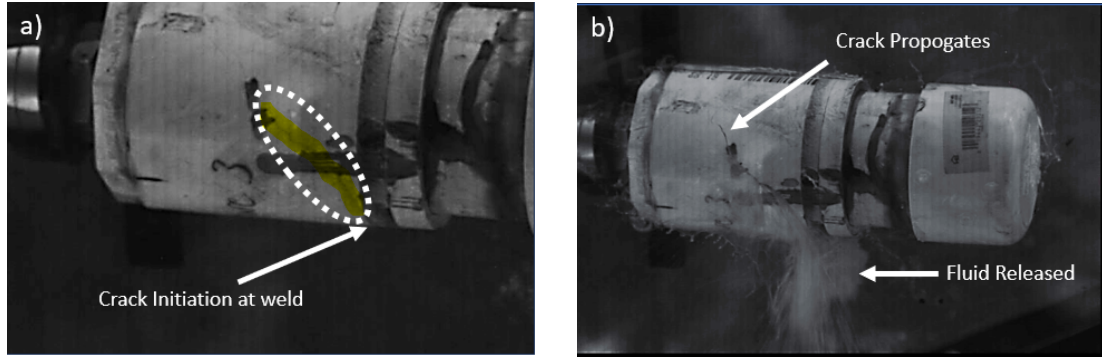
Weld failure under pressure. a) Crack initiates at weld zone. b) Crack propagates through pipe coupling and releases fluid.
